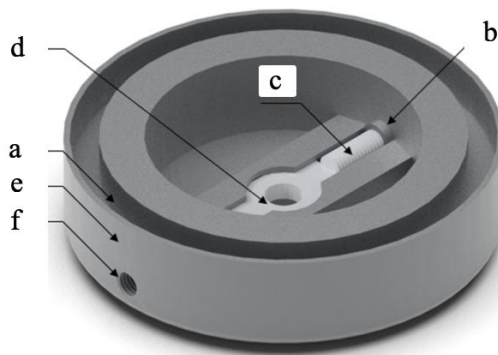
Structure of the blasting cap safety mechanism: a – annular opening ; b – threaded safety hole; c – screw; d – safety insert; e – blasting cap safety mechanism body; f – threaded safety hole
